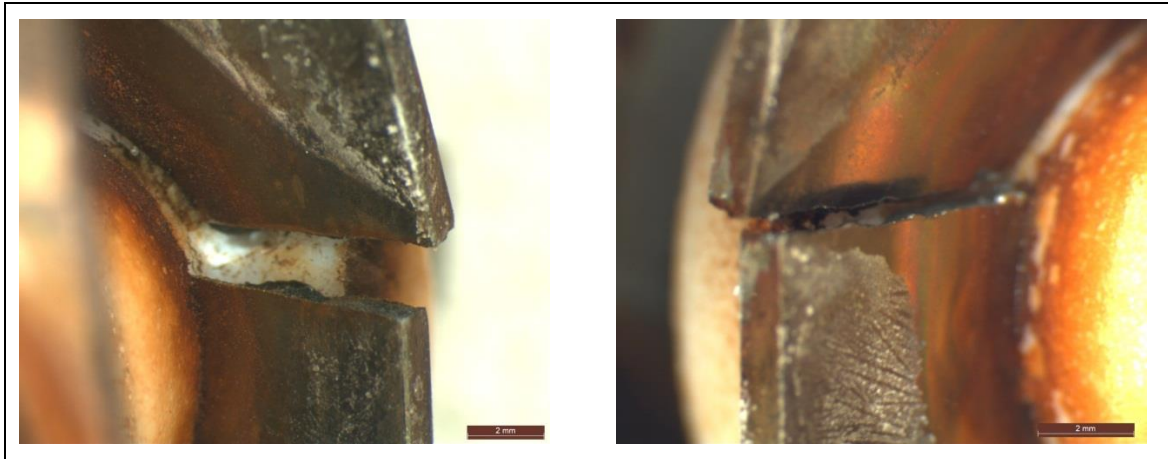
Batch 1 U-bend specimens showing cracking at bolt holes and tight clearance between specimen and insulator. (Left) S450 specimen (Right) S470 specimen.
